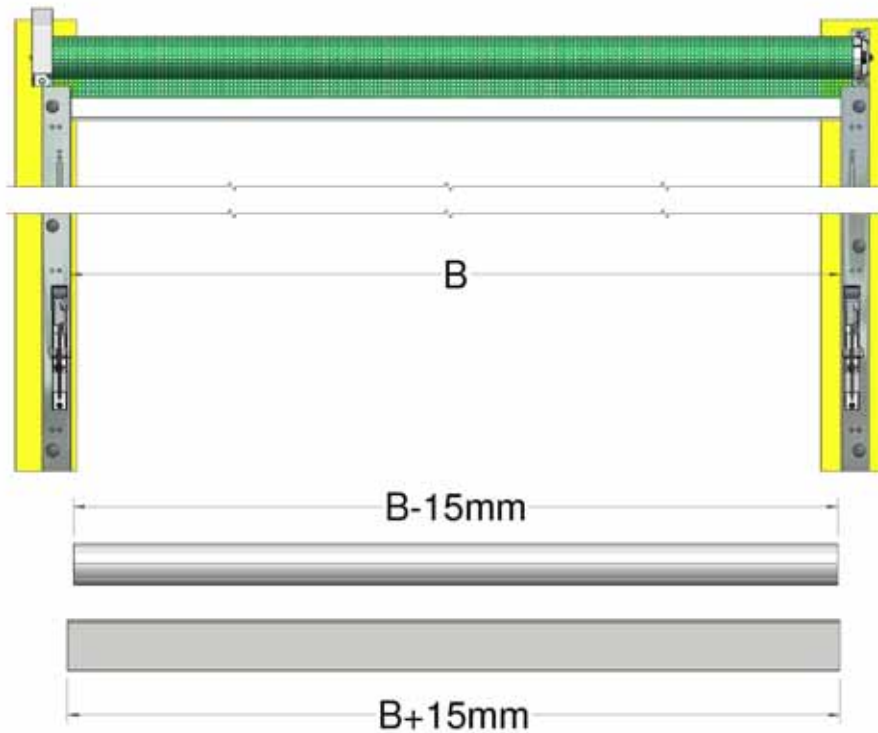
, Cutting Length of Bottom tube, Insert and Flap
